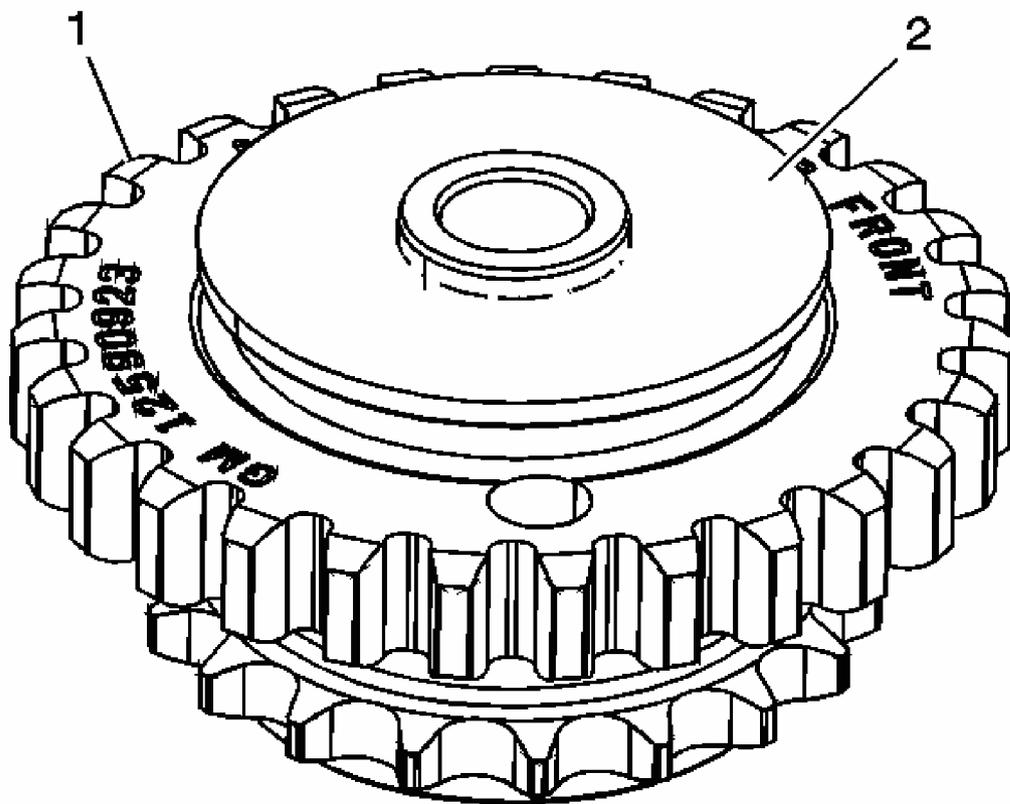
Inspecting Back Of Right Intermediate Sprocket
